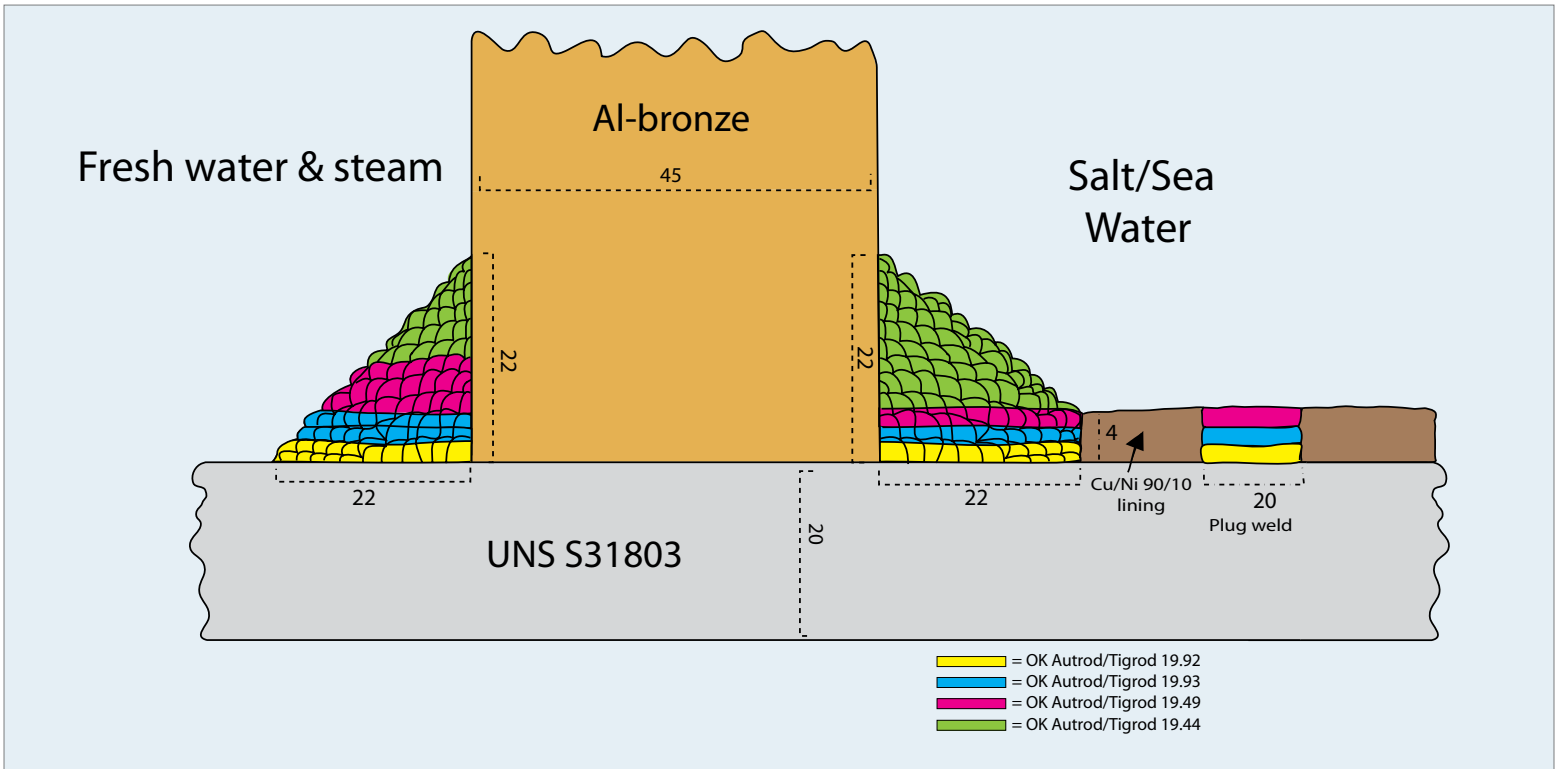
shows a sketch of a joint between the external wall and the water box inside an MSF unit built by Belleli (Figure 2). Salt water is the medium on one side with a Cu/Ni lining and fresh water and steam on the other side. The welding technique used is manual TIG with automatic wire feeding.
